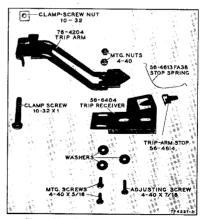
Trip-Arm and Trip-Receiver Assemblies
